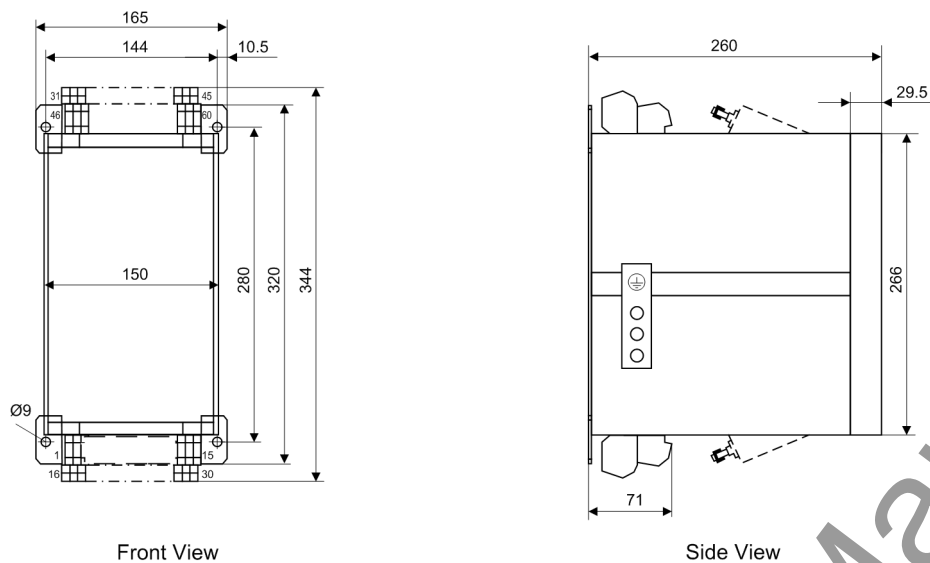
Dimensional drawing of a 7VK610 for panel surface mounting (housing size  $\frac{1}{3}$ )
